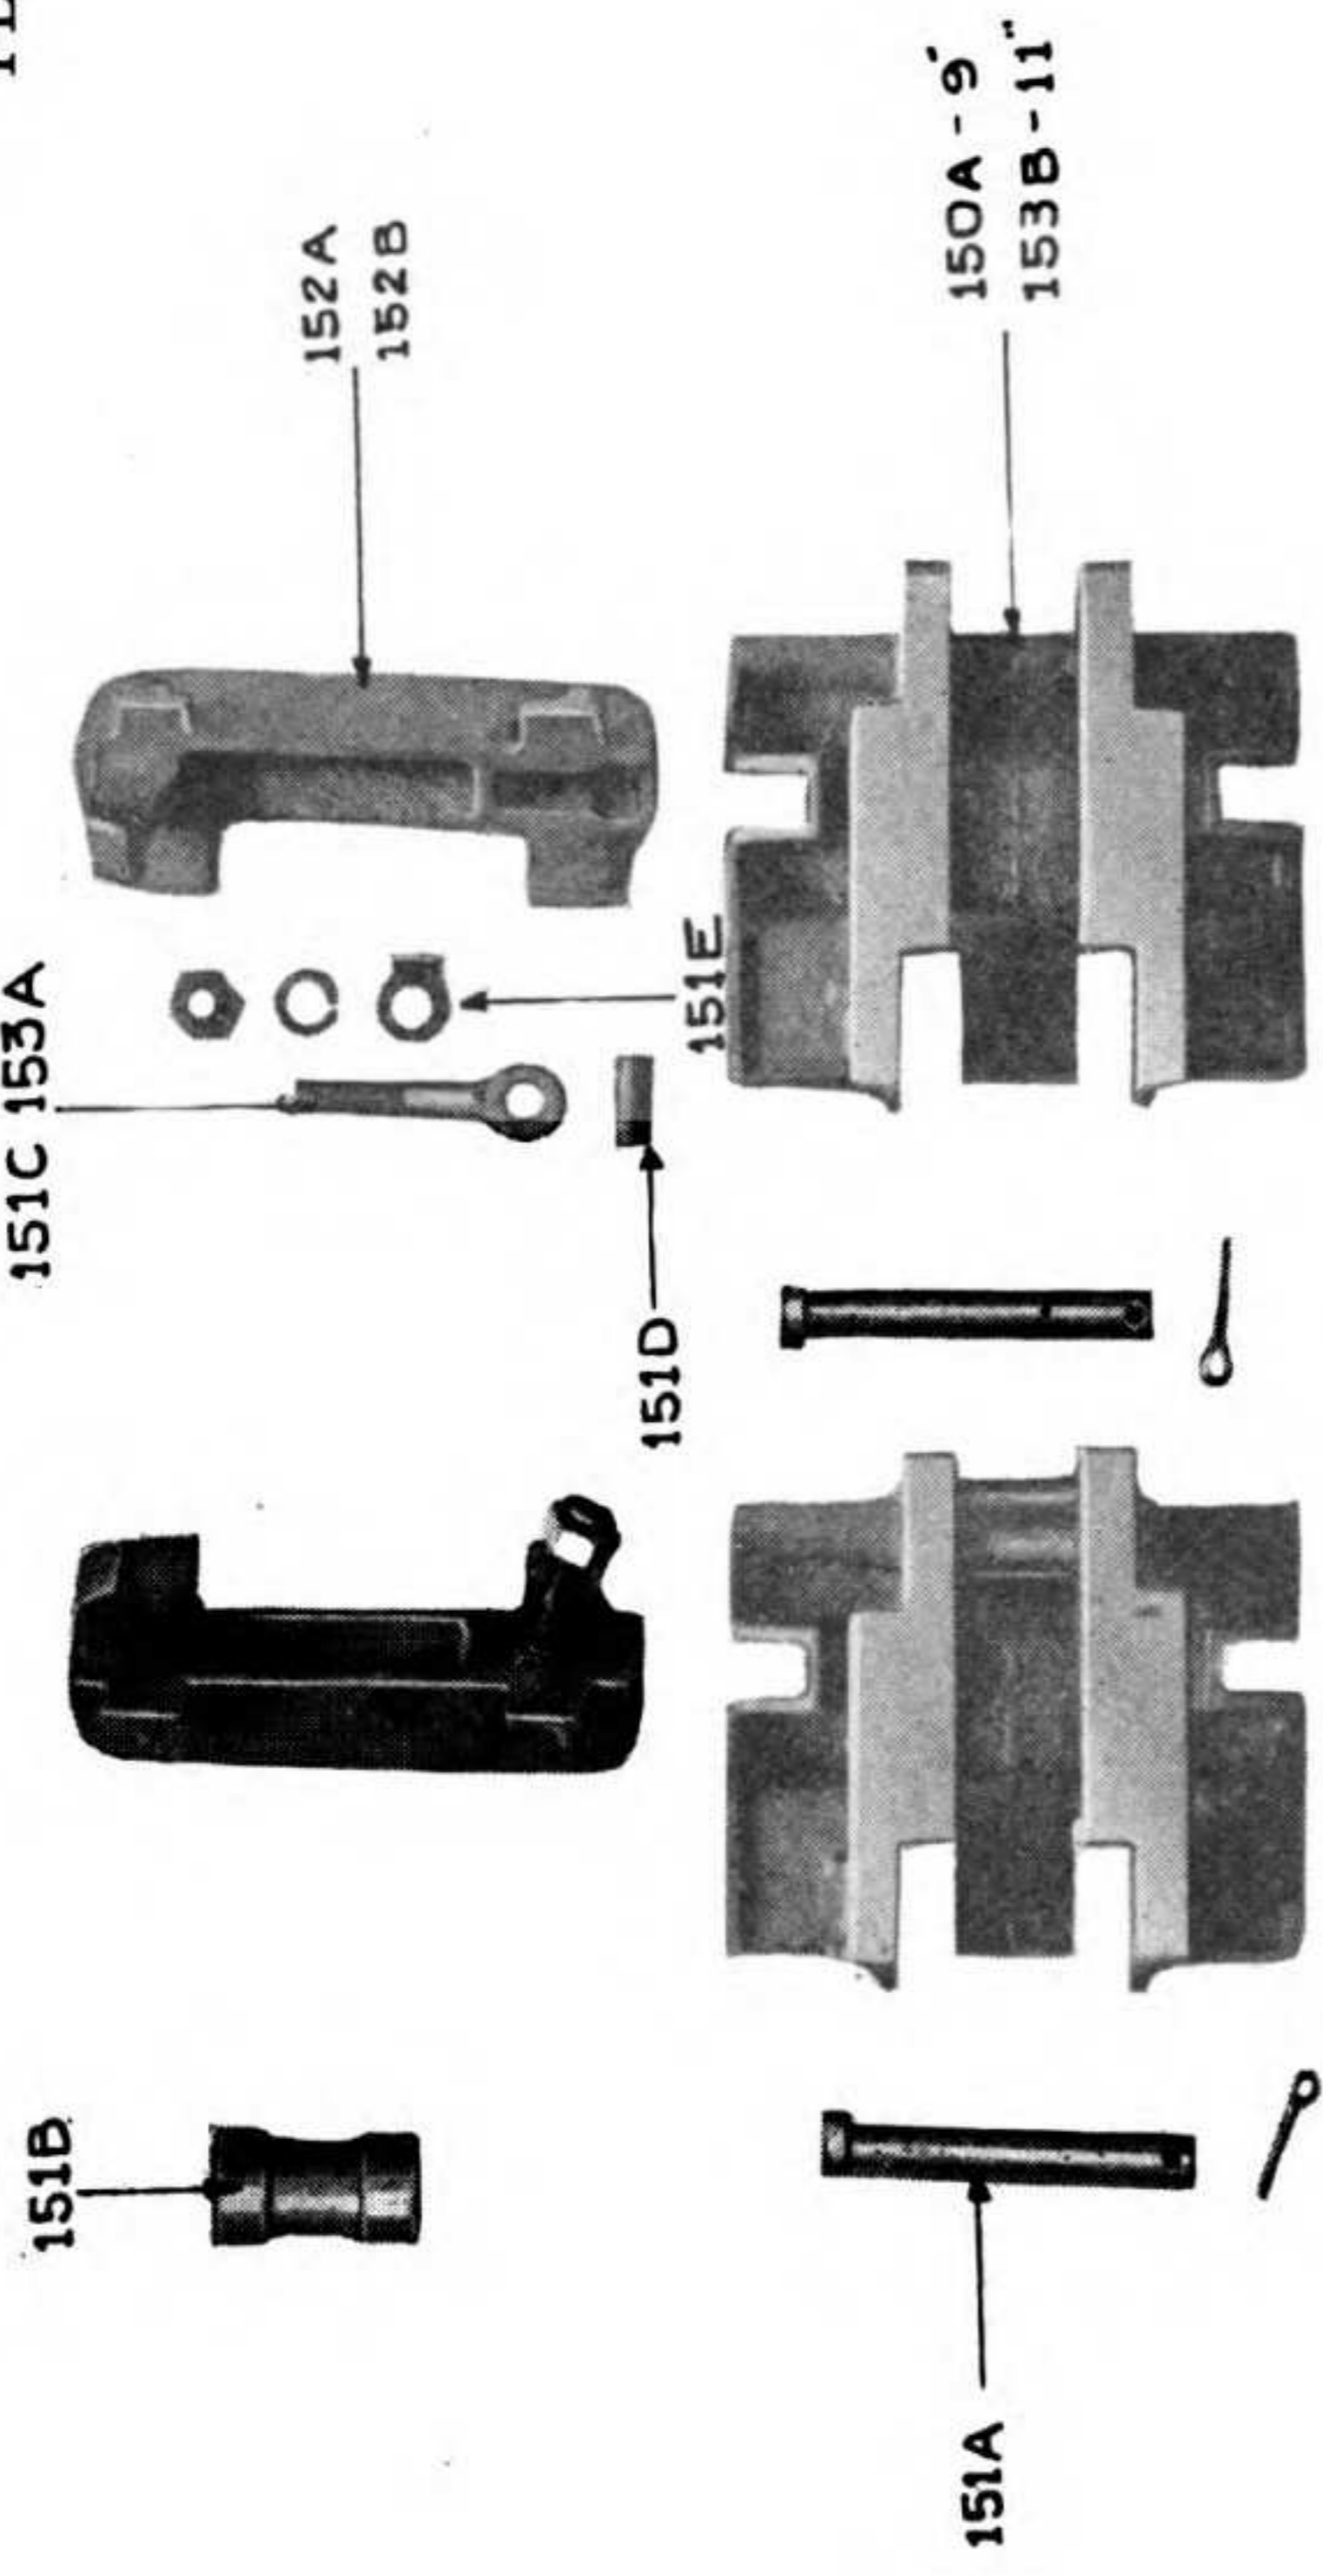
REAR ROLLER FRAME ASSEMBLY
